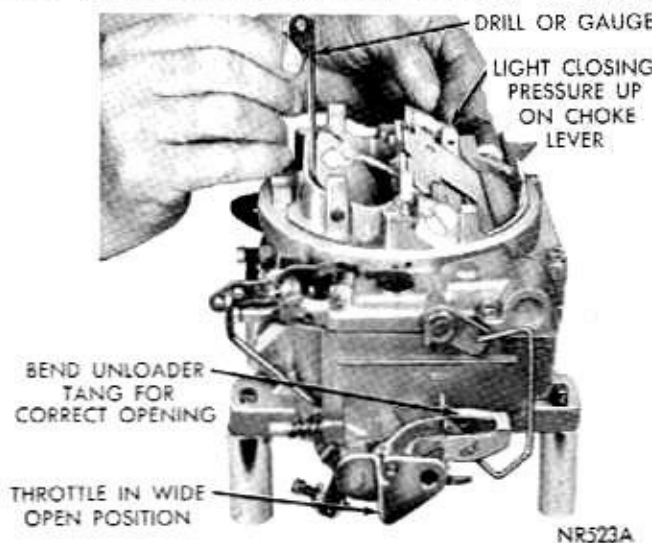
Checking Choke Unloader (Wide Open Kick)
